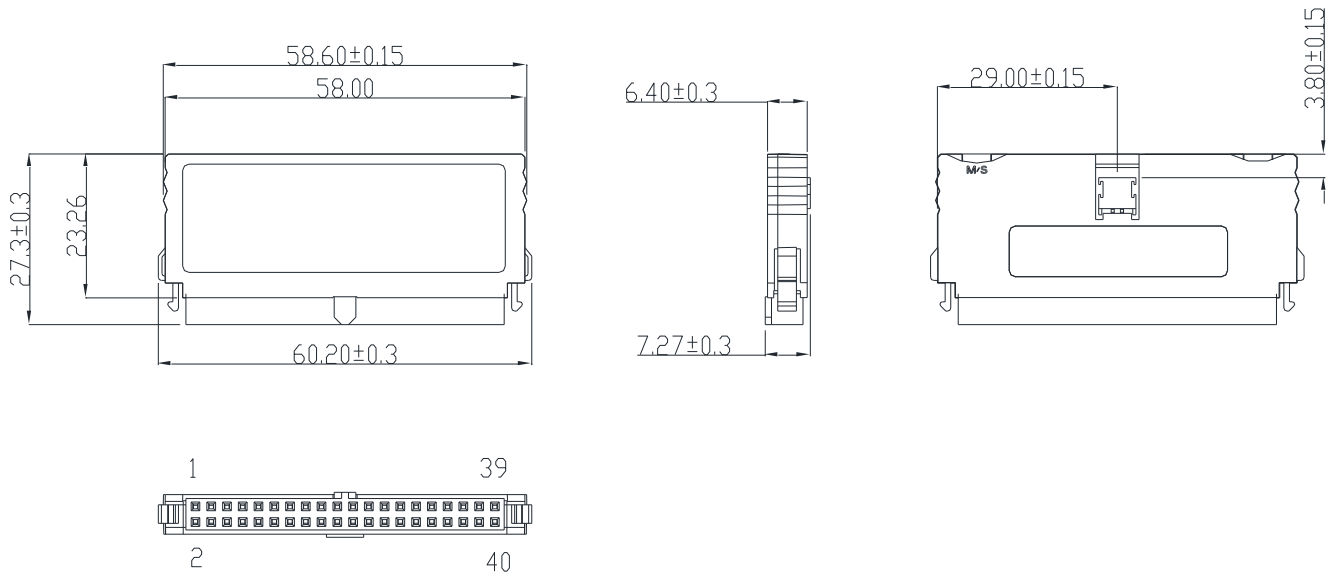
Mechanical Dimension of EDC1SE 40-pin
